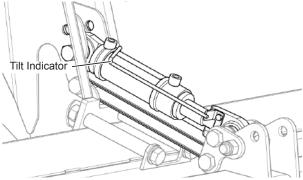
Hydraulic Tilt Cylinder & Indicator
